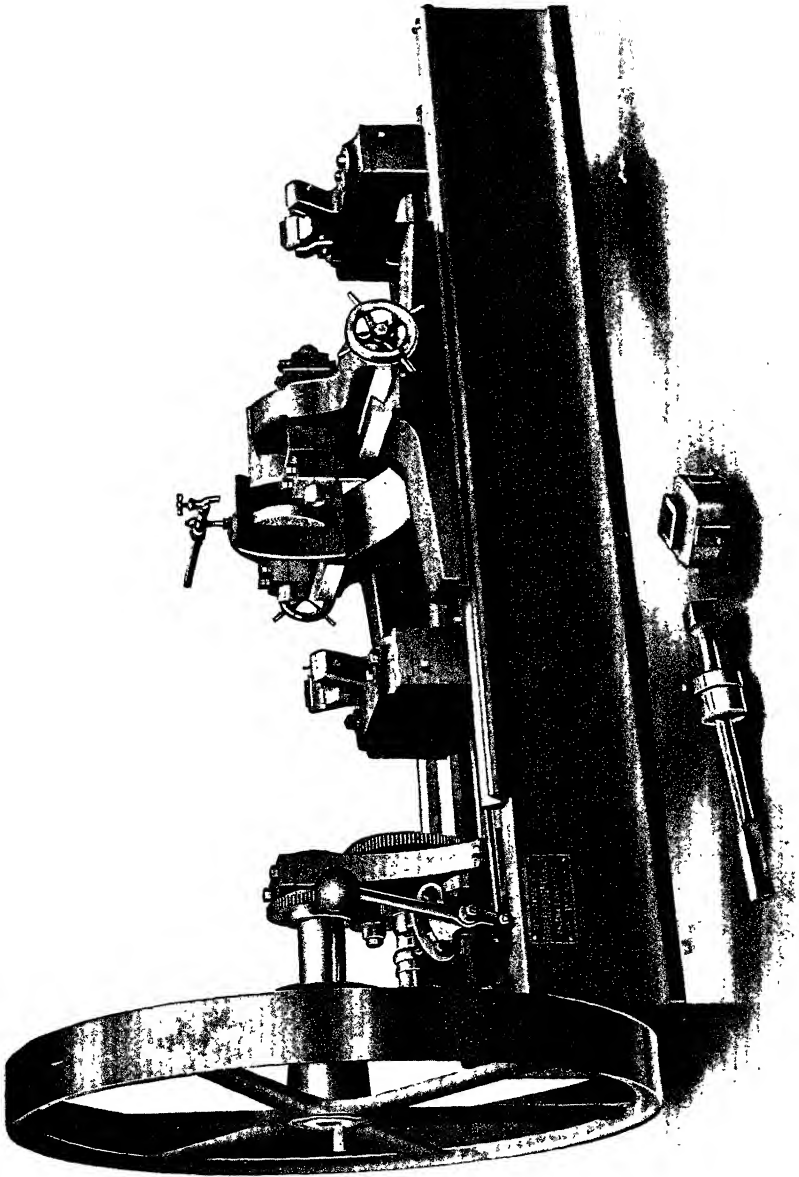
ROLL GRINDER. (Farrell Foundry and Machine Company.)
